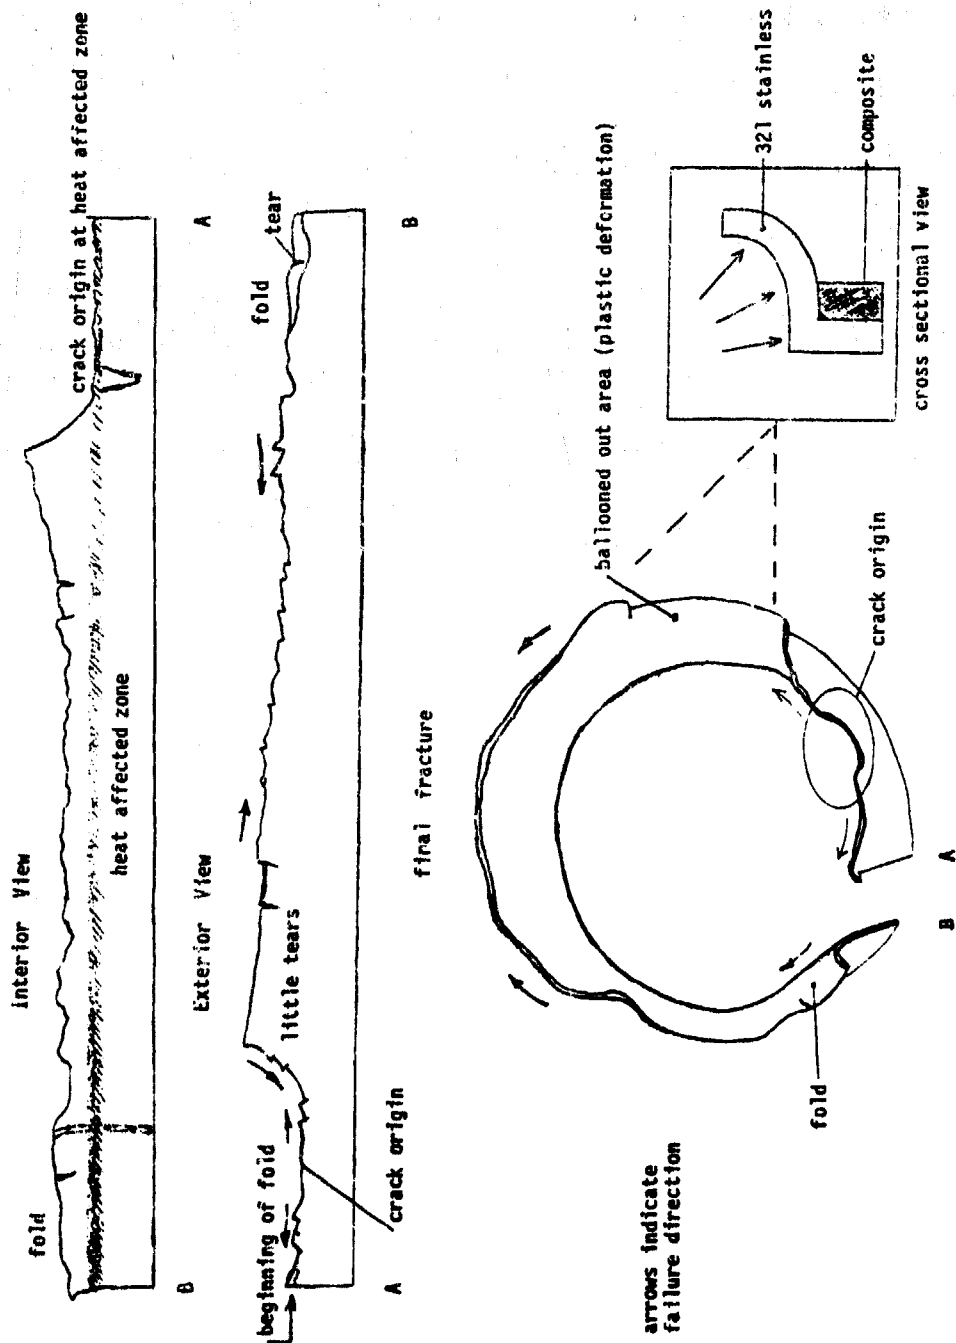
Schematic of the fracture surface of the metal liner of the cylinder body.
